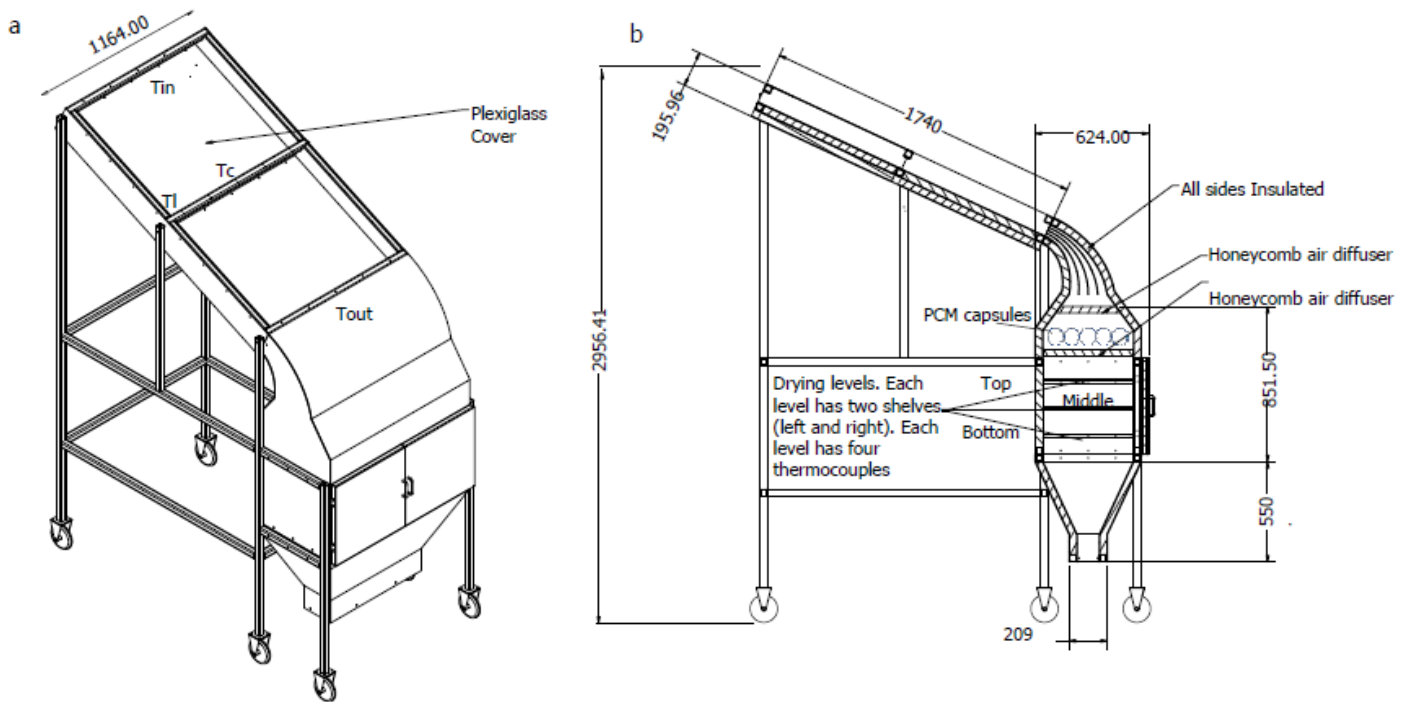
(a) Isometric view and (b) side cross-sectional view of the dryer with PCM capsules showing the dimensions of the different components of the dryer in mm.
